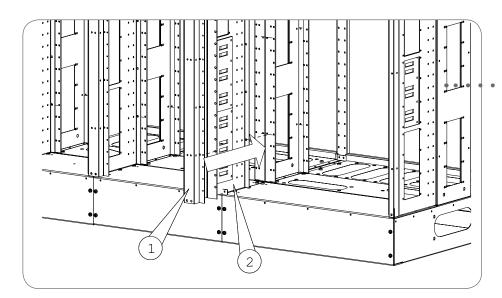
Installing busbar insulator adapters to E-serie cell centre frames. The busbar insulator adapters are fastened to the frame plates and back profiles.
